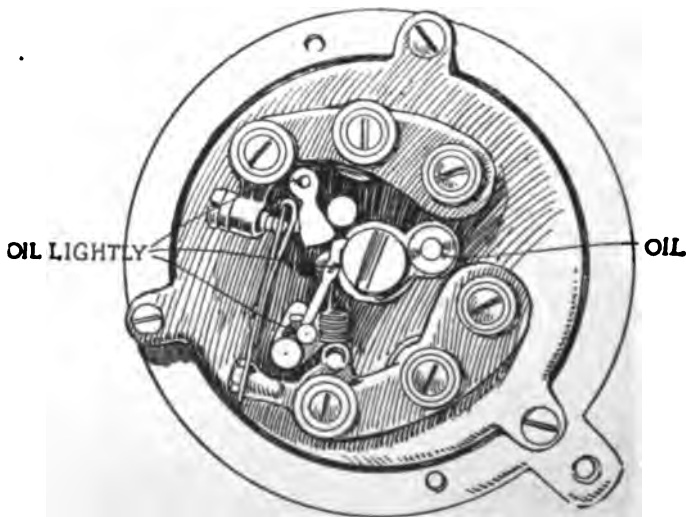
Parts of Atwater Kent ignition system that should be oiled
